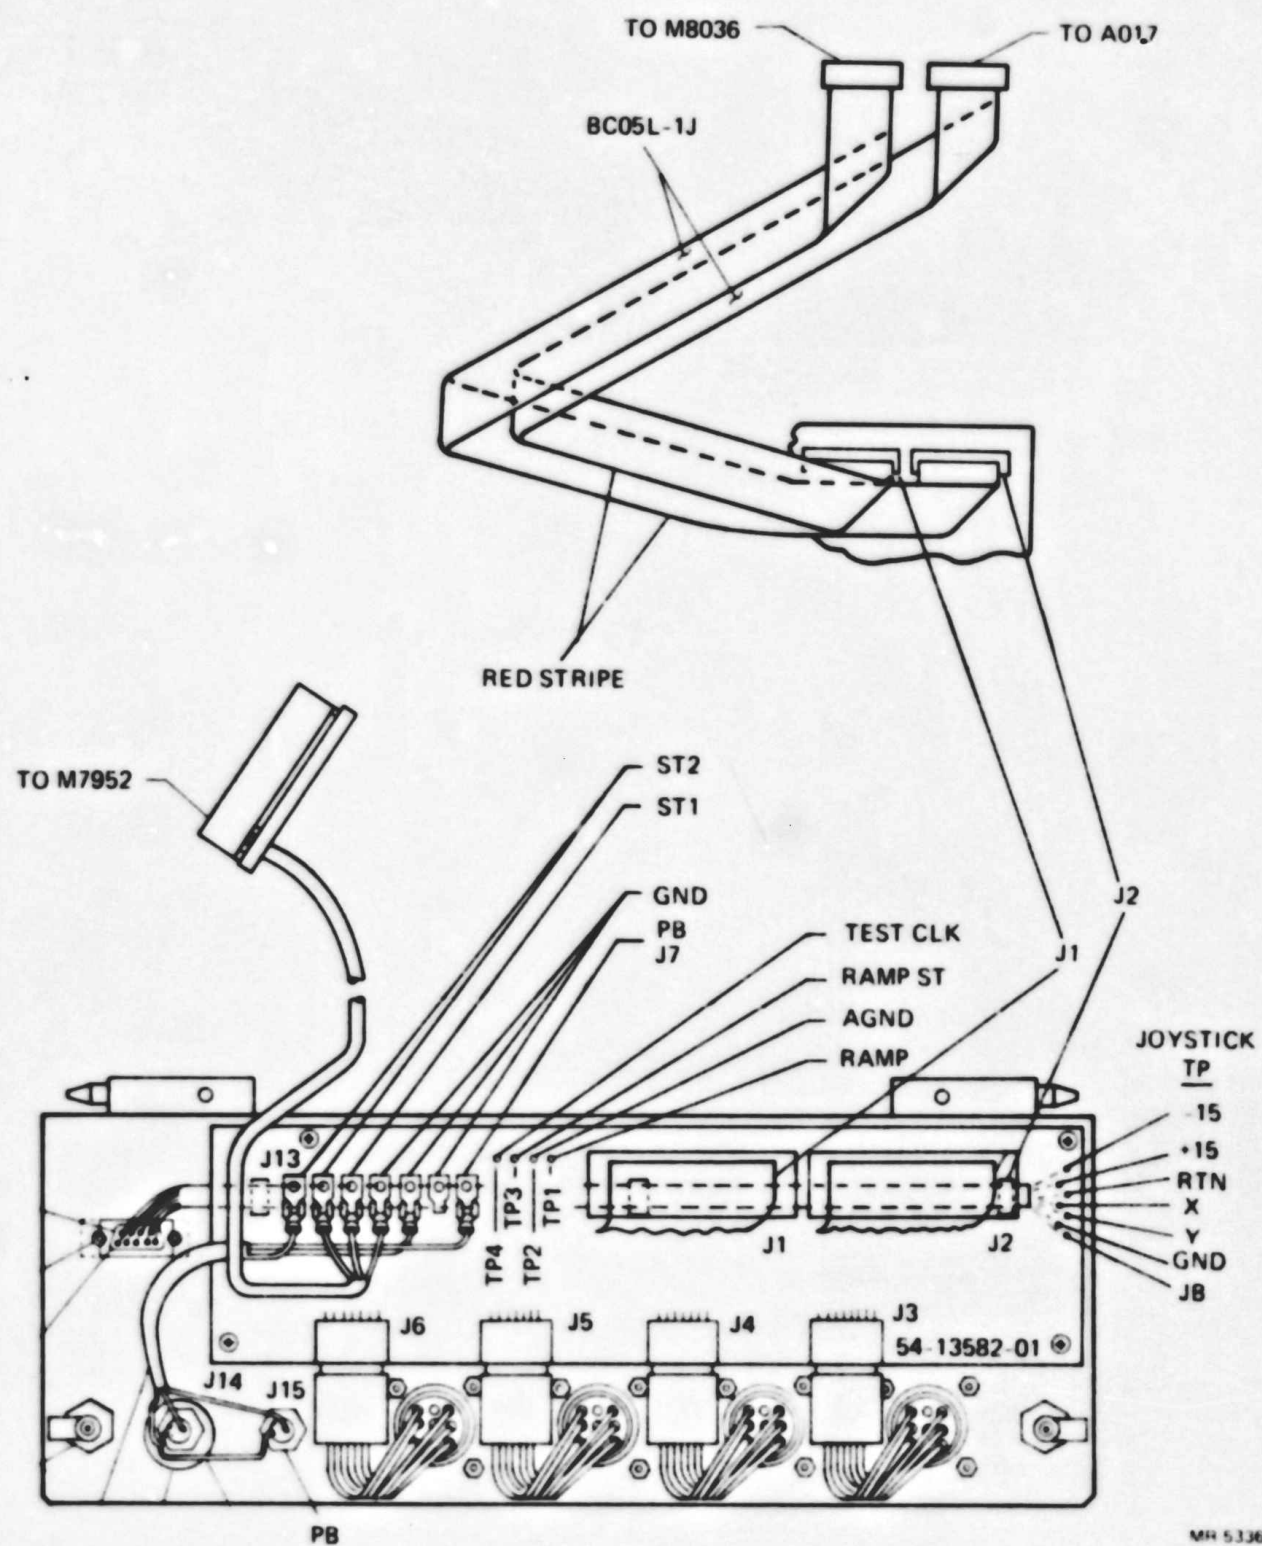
Attaching Ribbon Cables to the Connector Panel Assembly
